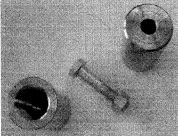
Bolt-nut assembly and clamps for tensile tests.
